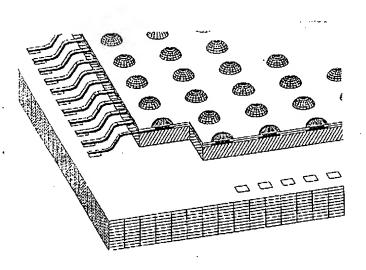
Sectional view of a fan-in µBGA mounted to the face of a die
